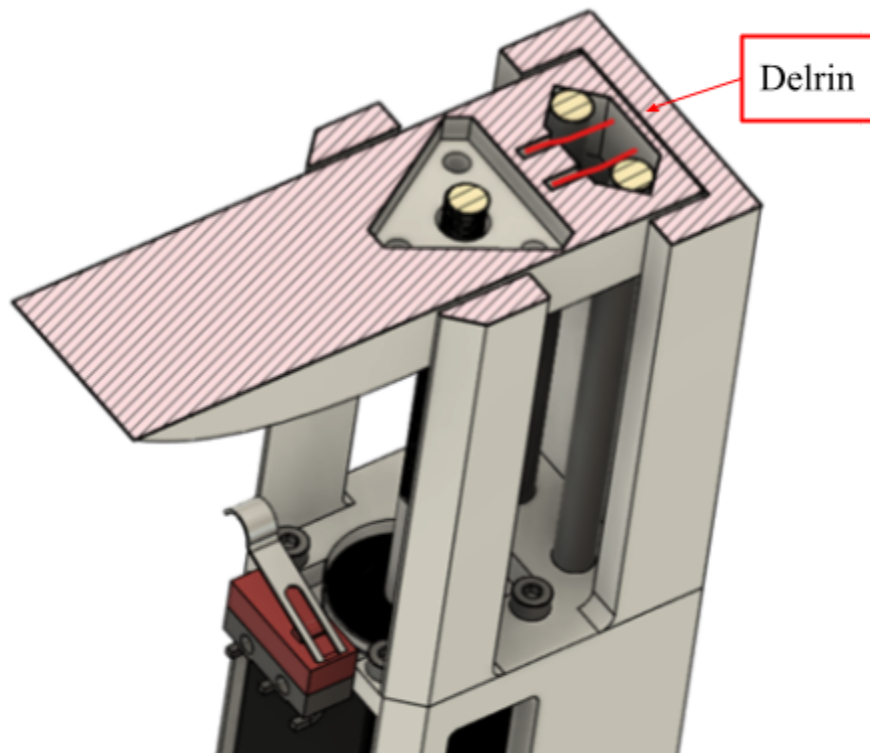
Cross section view of the cantilever, showing the Delrin chips (red), and how they contact the vertical rods.
